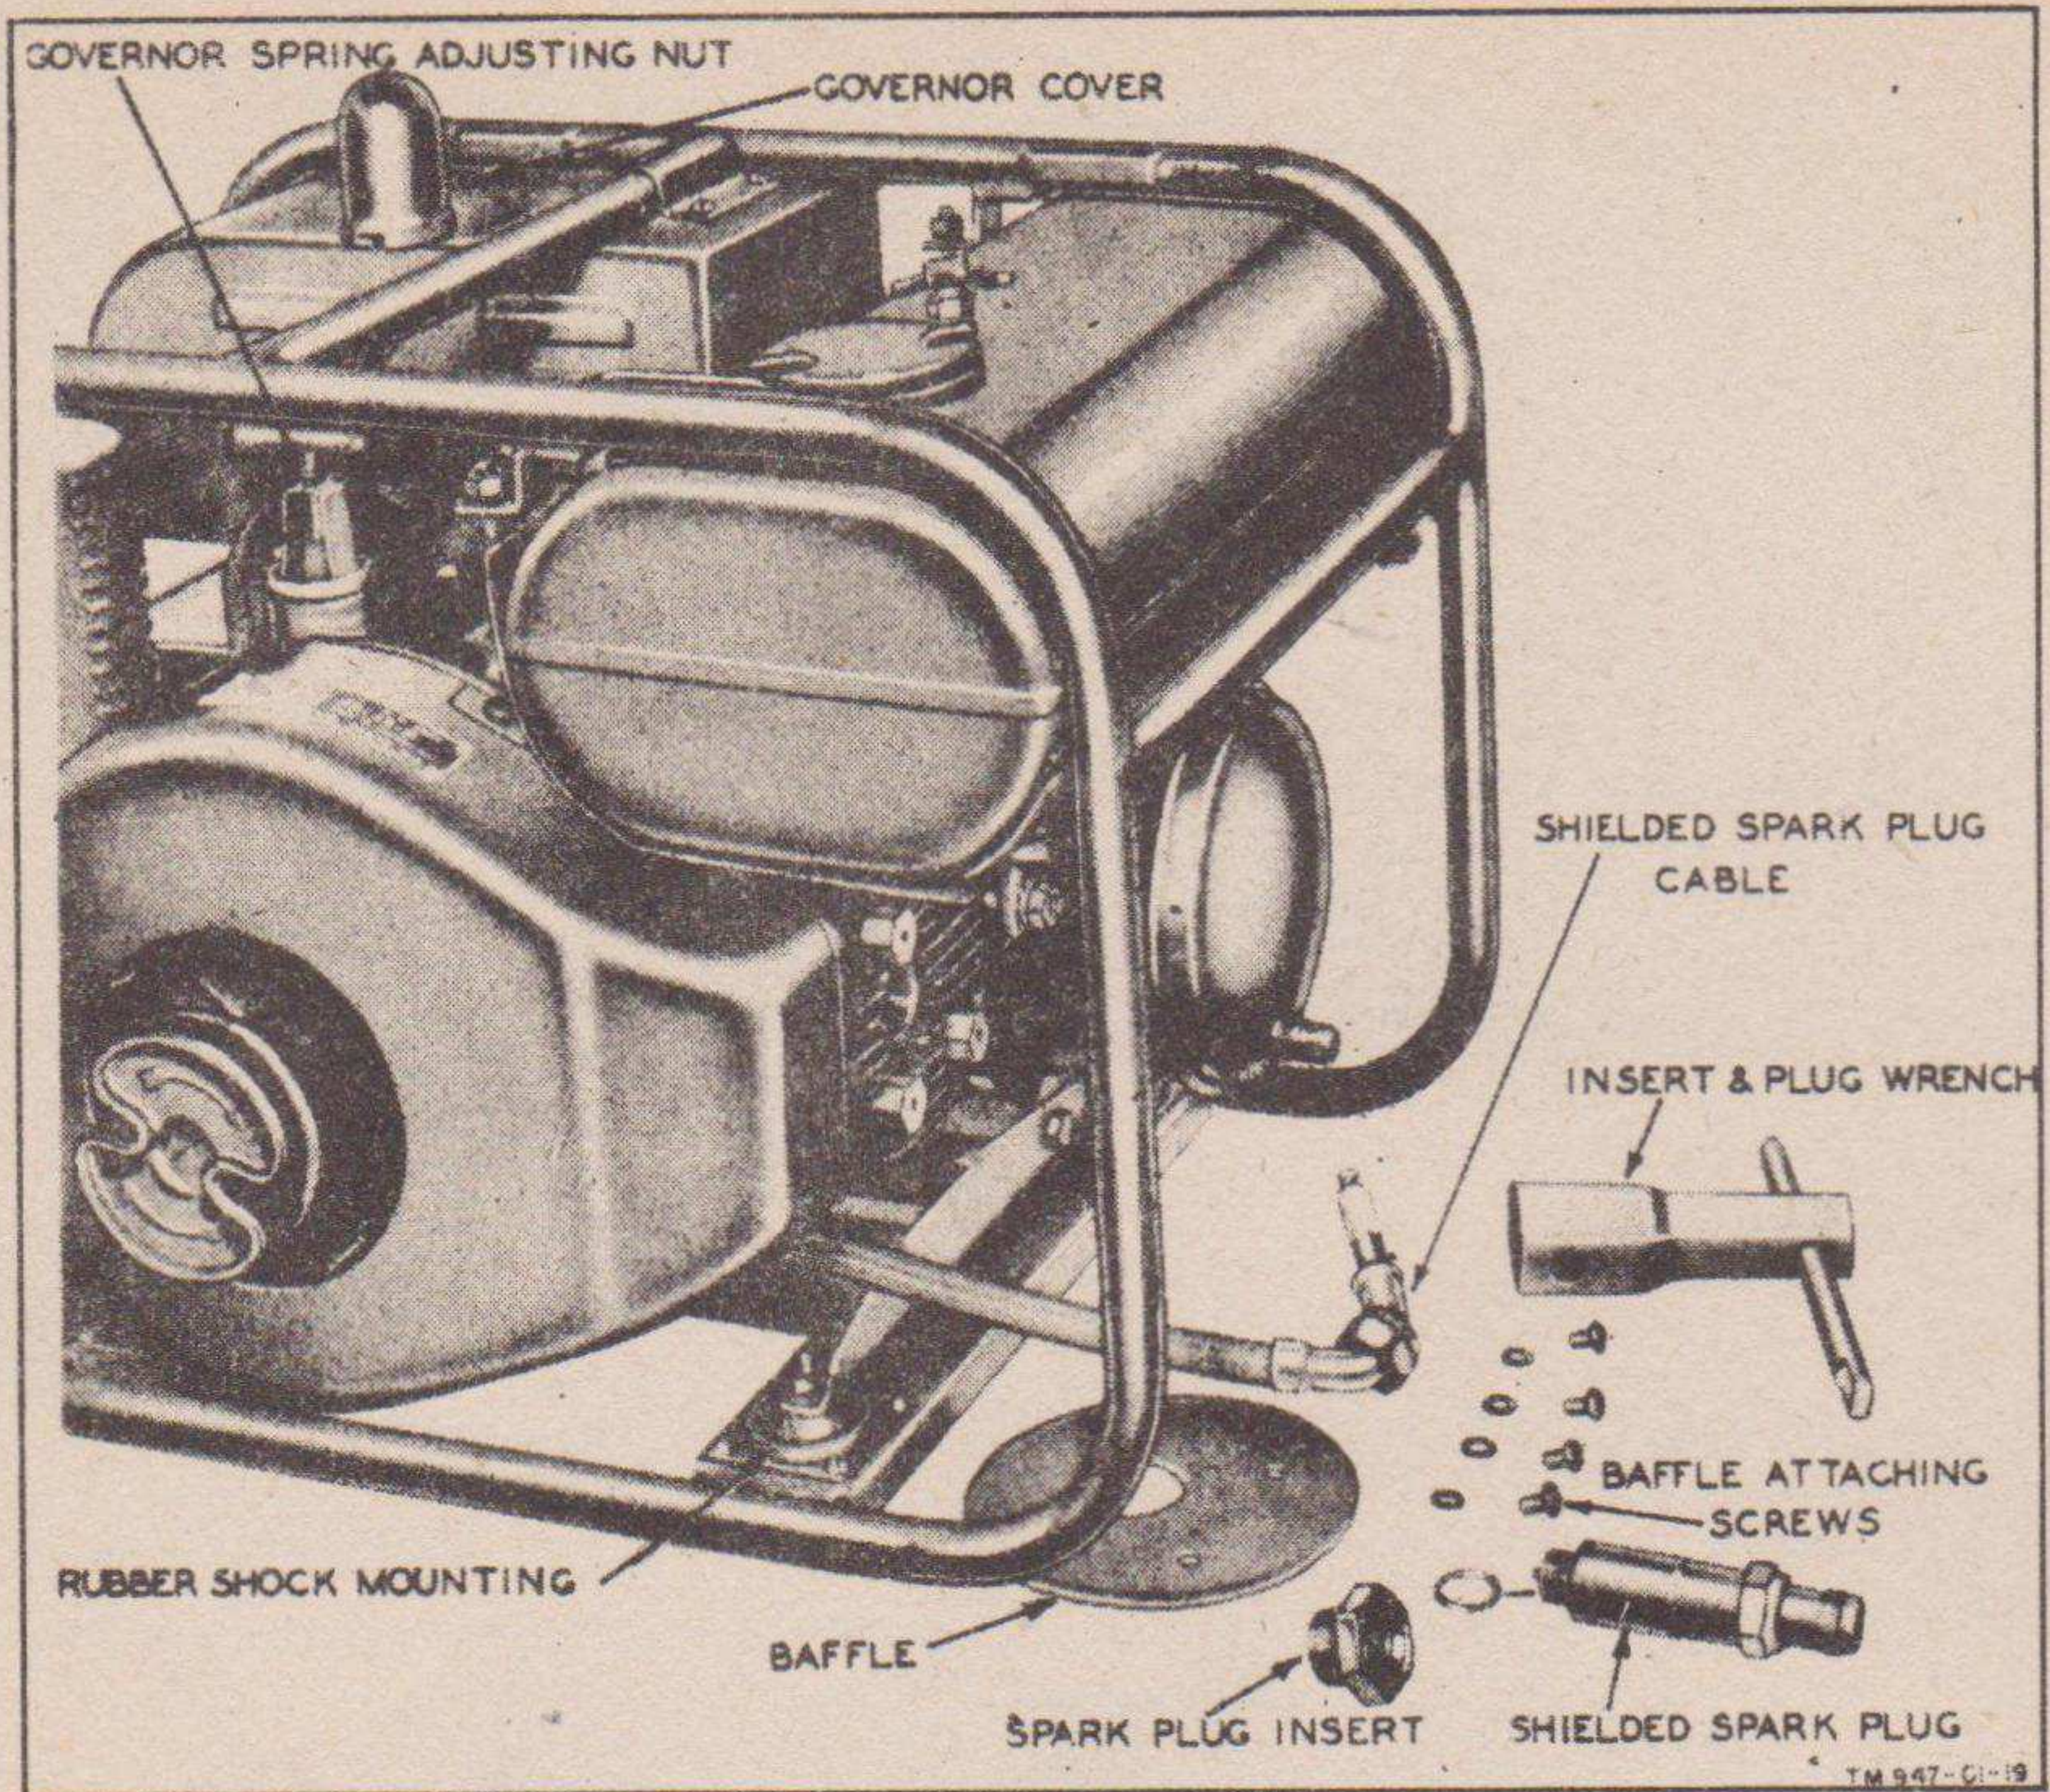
Power Unit PE 210 B, spark plug, spark plug adapter, and ignition shielding.
